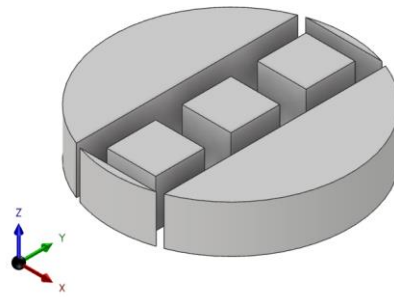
Model designed for the milling of test cubes for shrinkage measurements.
